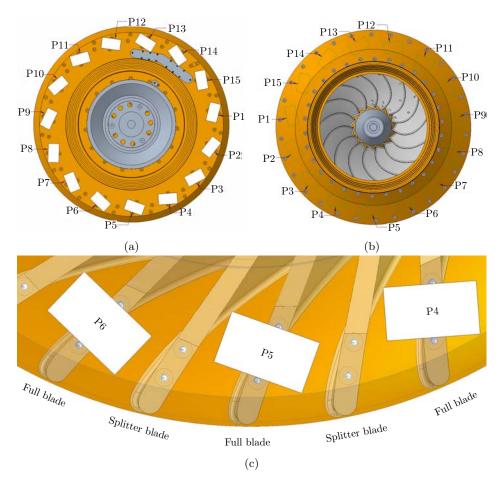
Patch placement on runner viewed from the top (a), the bottom (b) and shown relative to the blade mounting surfaces (c)
